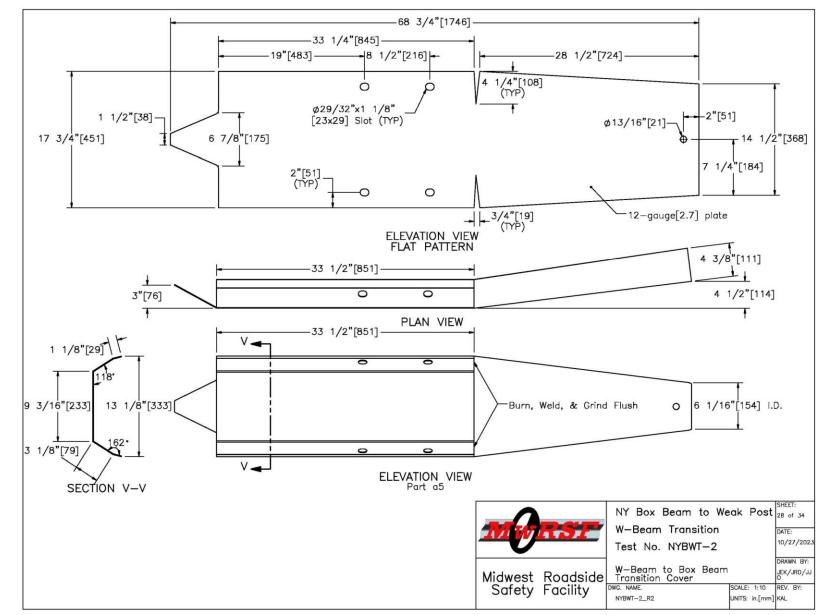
Box Beam to W-Beam Transition Cover, Test No. NYBWT-2
